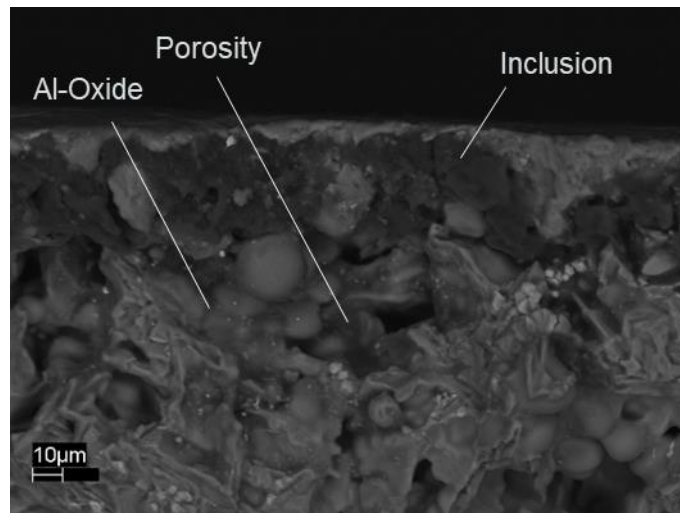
Casting defects identified on the fracture surface of fatigue specimens machined from automotive components. Critical casting defects were identified as porosity, oxides, and non-metallic inclusions.
